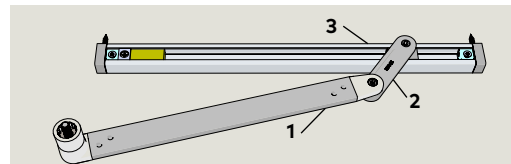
T275 – Splined pull arm assembly, RH, 1 - 2 3/4" reveal
